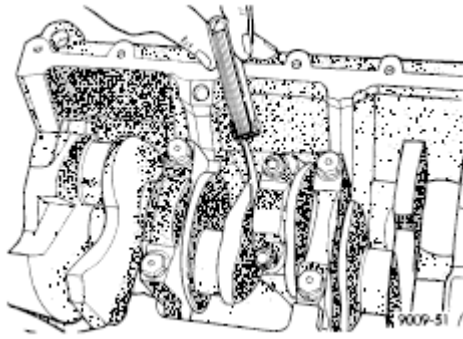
Measuring Gap Between Connecting Rod And Crankshaft Journal Flange
